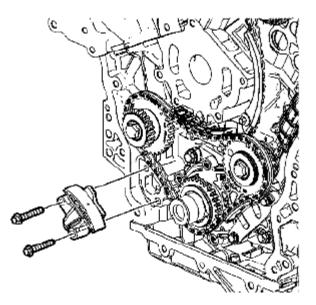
Identifying Right Secondary Camshaft Drive Chain Courtesy of SUZUKI OF AMERICA CORP.
